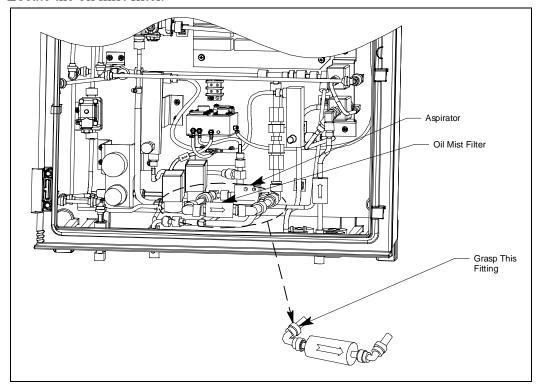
Oil Mist Filter Removal for Aspirator Replacement
